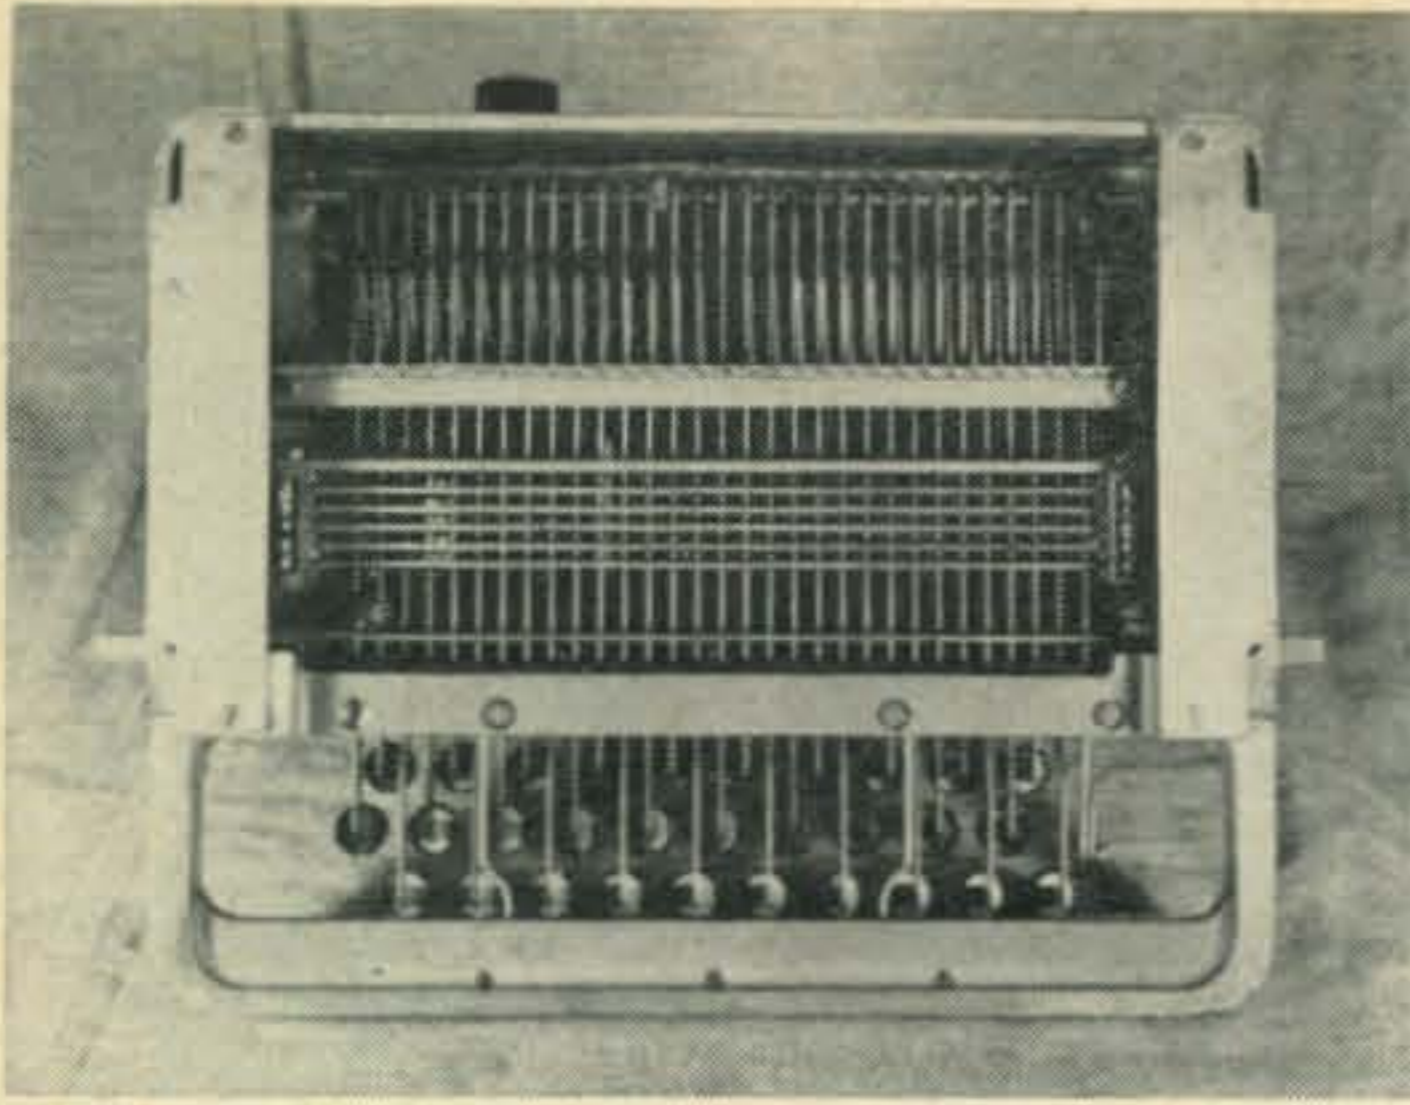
Bottom view of the Model 15 keyboard showing the five crossbars.
